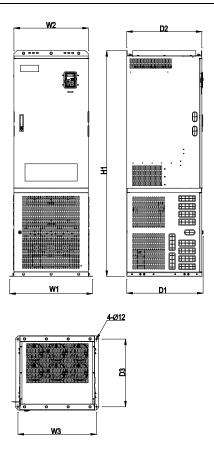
Single-unit installation dimension for 380V 355–500kW and 660V 400–630kW models
